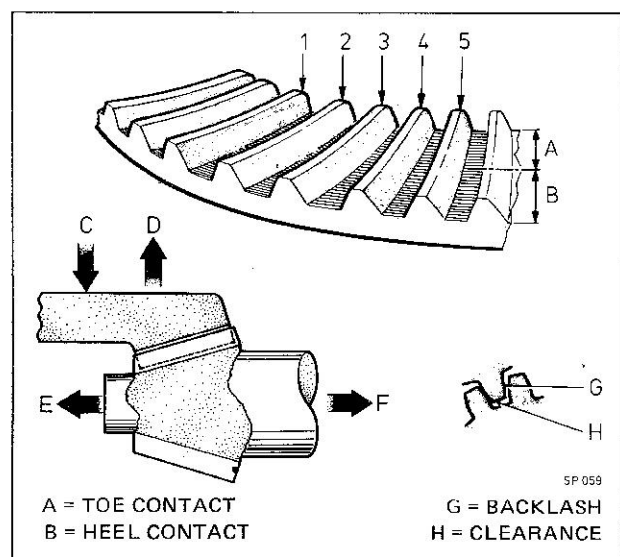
Differential - Bevel Pinion Tooth Contact Markings
